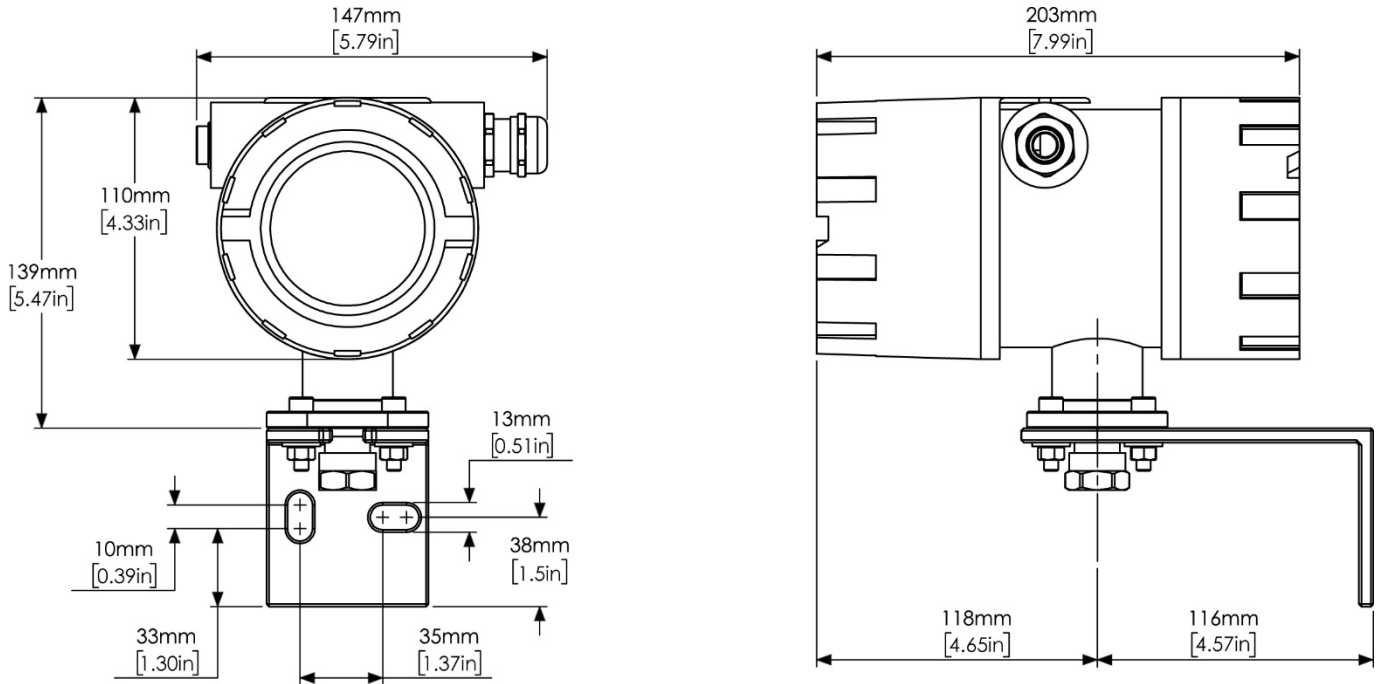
Dimensional Drawing: TCE 8000 Wallmount
